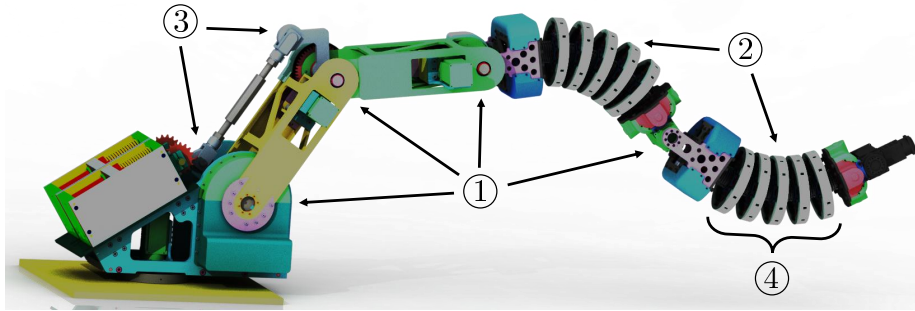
Overview of our ISCR concept, showing ① revolute joints, ② continuum segment modules, ③ the static-balancing mechanism, and ④ the multi-modal sensing disks on each continuum segment.
